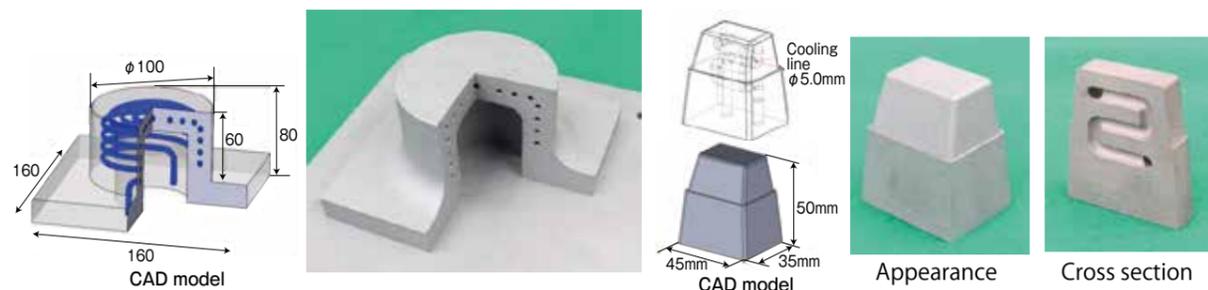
3D model of a mold manufactured using DAP™-AM HTC40.
